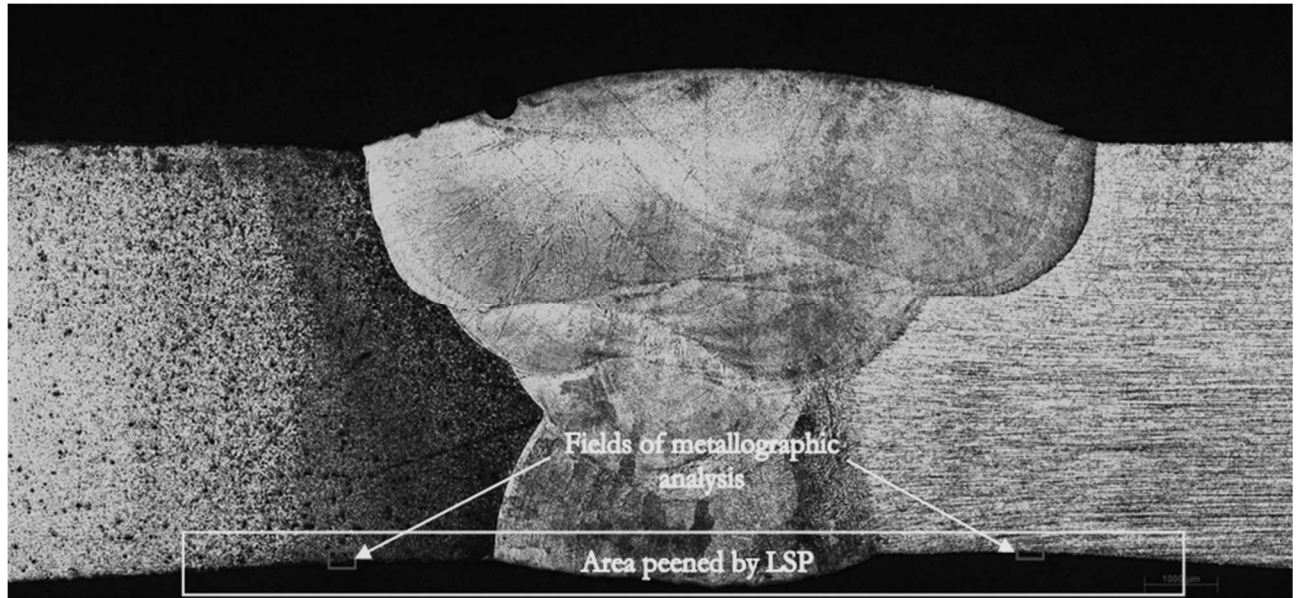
Macro etch of the evaluated dissimilar weld cross-section after LSP treatment. Left part of the weld consist of P265GH steel and right part of the weld consist of the X6CrNiTi18-10 steel. LSP treatment was done at the inner surface at a distance of 4 mm to both sides from the root of the weld
